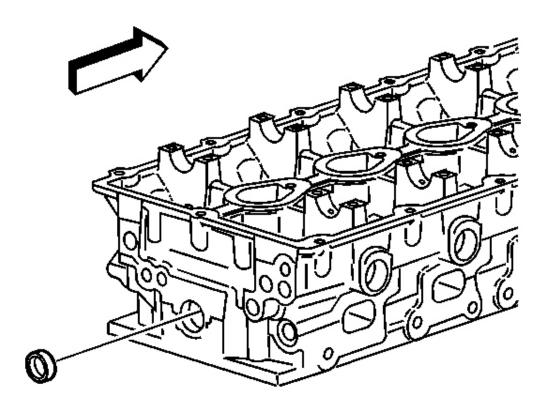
View Of Water Jacket Plug Courtesy of GENERAL MOTORS CORP.
